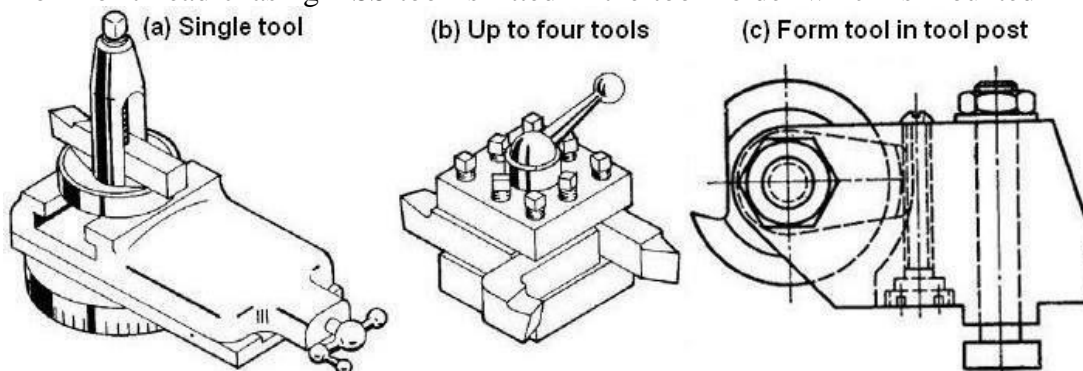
Mounting of (a and b) shank type tools in tool post and (c) form tool in tool post
